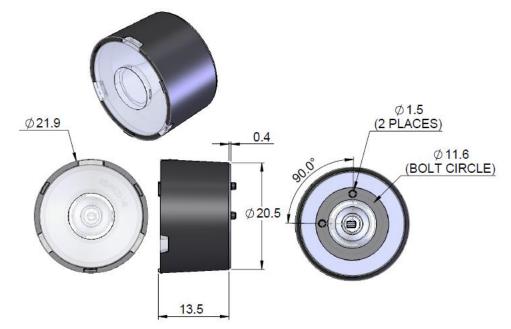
FNL-S1-20-HB1 drawing (dimensions in mm)
